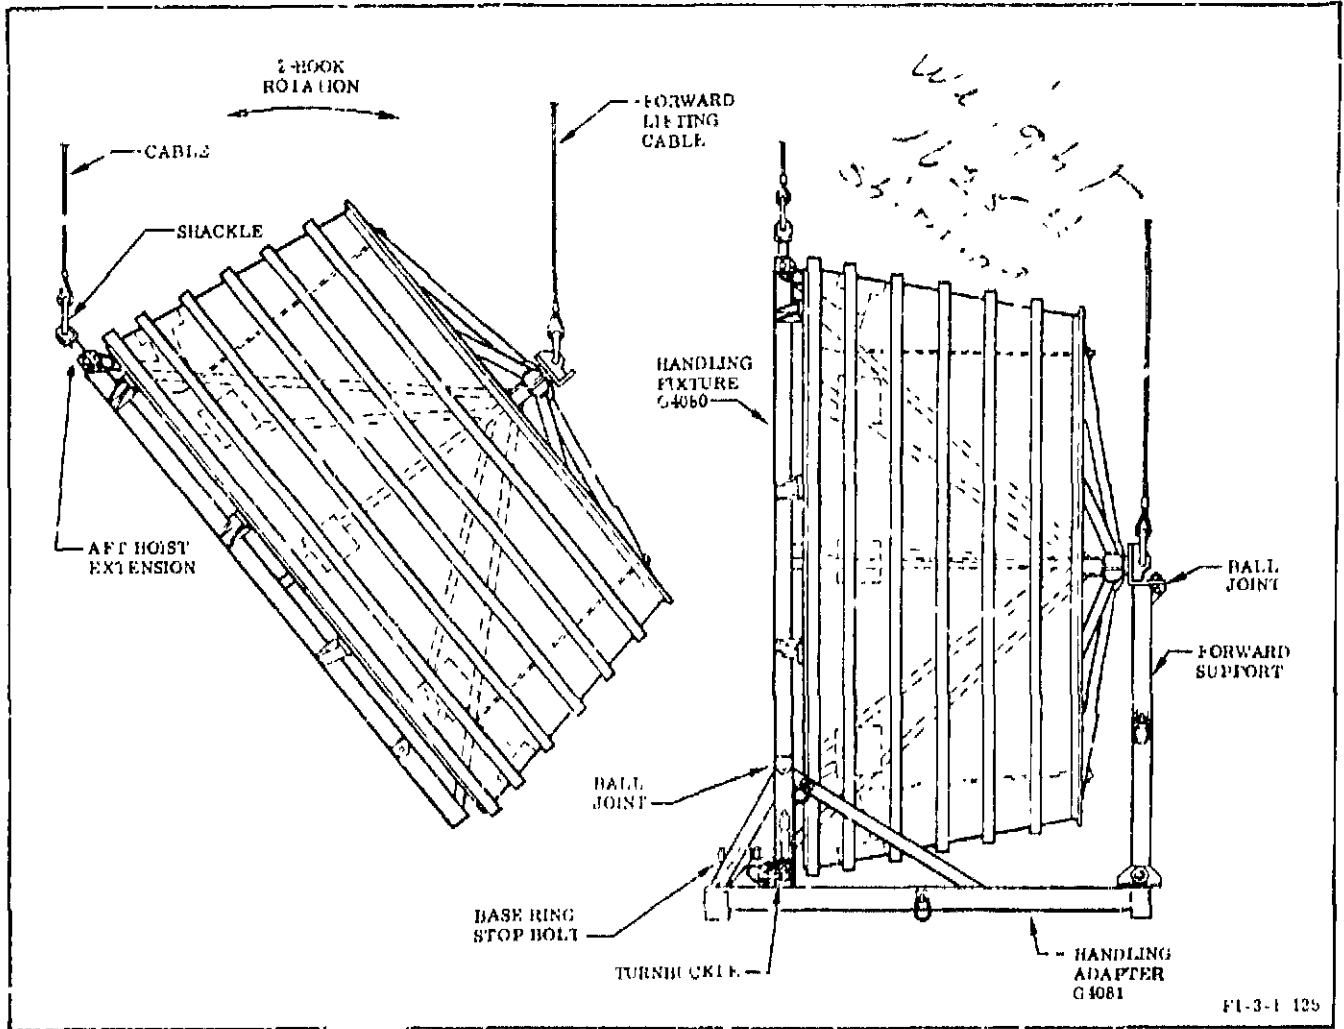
Removing and Installing Nozzle Extension Handling Fixture (Nozzle Extension Installed) on Nozzle Extension Handling Adapter
